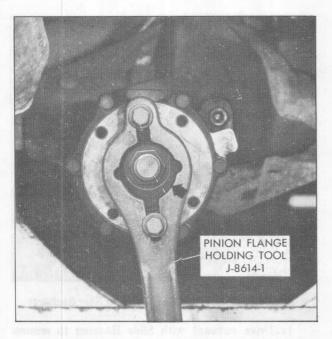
Pinion Flange, Nut and Shaft Marking
